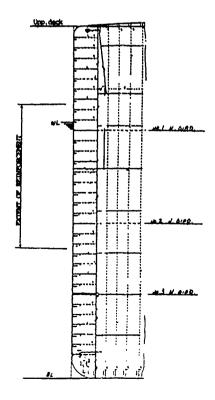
Extent of Reinforcements to Side Shell Longitudinals
